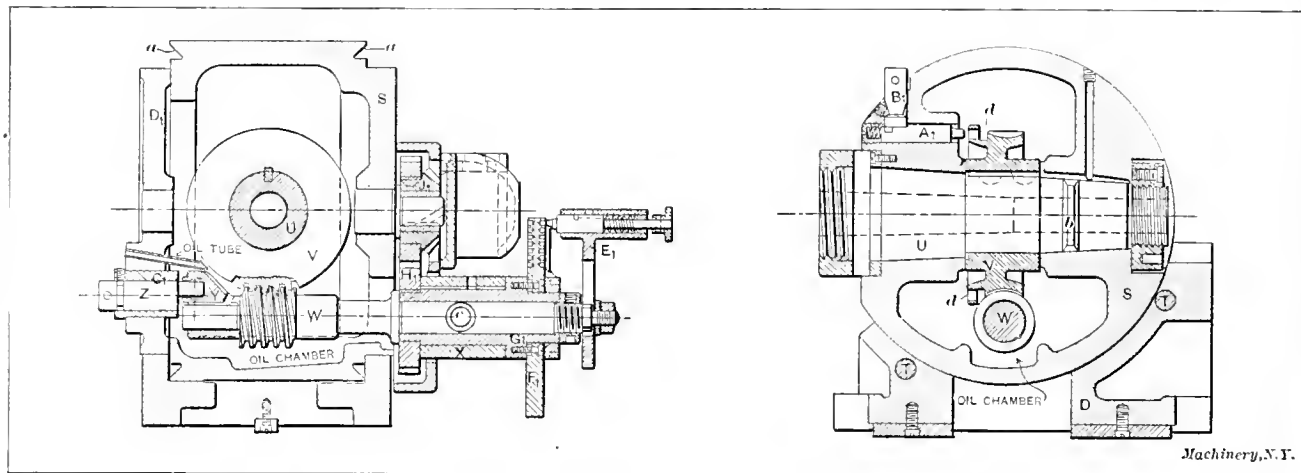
Mechanism of the Dividing Head showing Direct Indexing Device, Worm Adjustment, etc.
